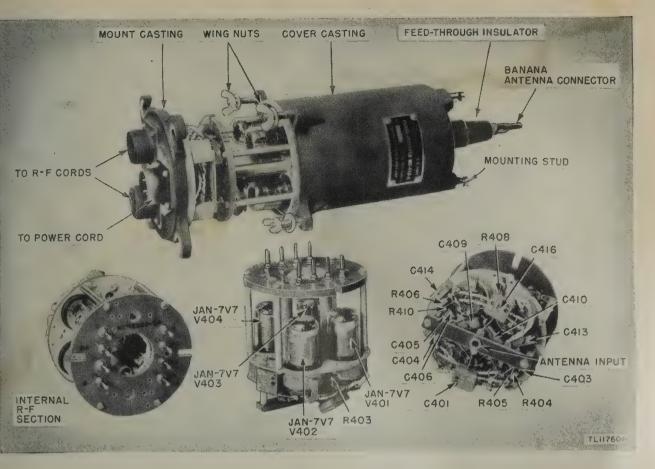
Phase Inverter MC-413-A, assembly and placement of parts.
